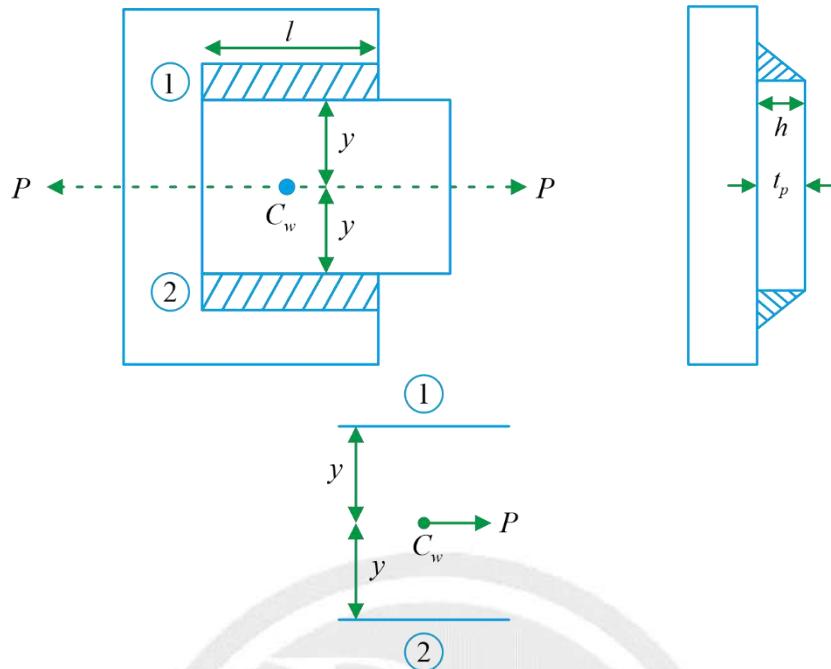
Symmetrically loaded Parallel fillet weld
